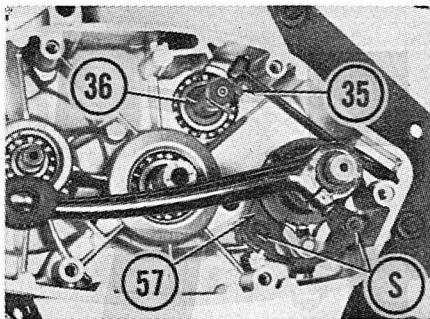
View of the shift assembly on 50 and 80cc models. Refer to text when adjusting.
